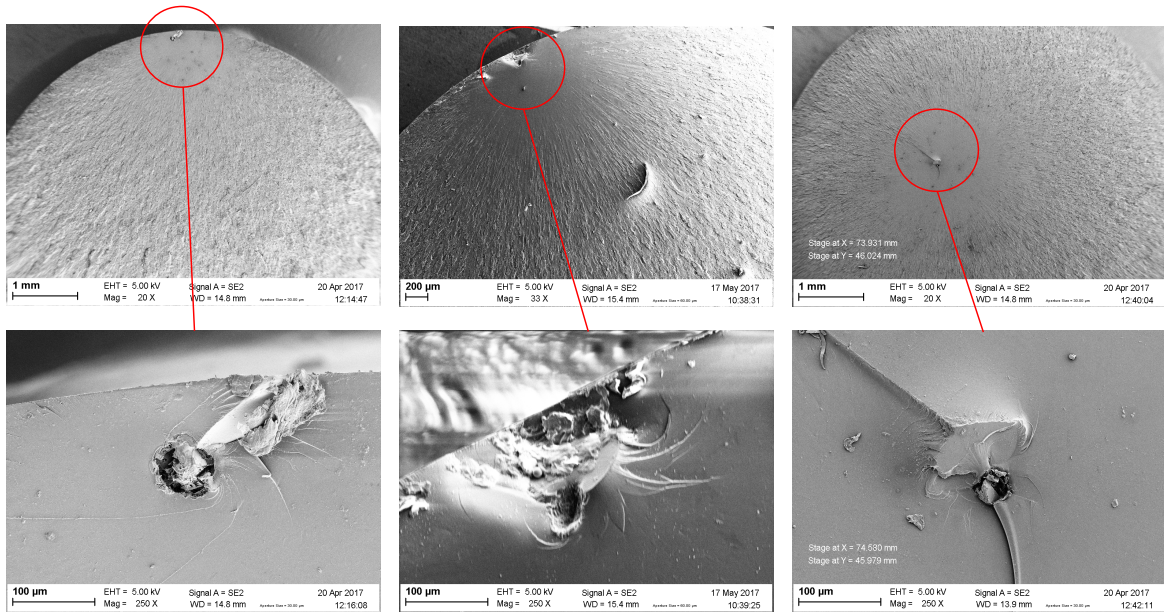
Fracture surfaces of the specimens broken under cycling loading at 50 % of the stress at failure with a zoom on the initiation of the fracture. From left to right: sample 4 fatigue, sample 5 fatigue and sample 6 fatigue.
